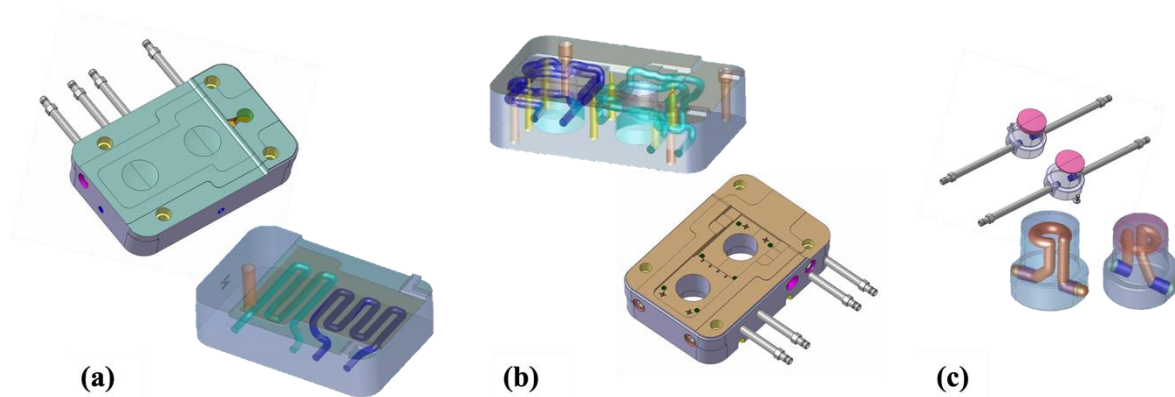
Inserts produced through SLM for heat transfer control and respective inner channels. (a) cavity insert, (b) core insert, (c) core lens inserts.
